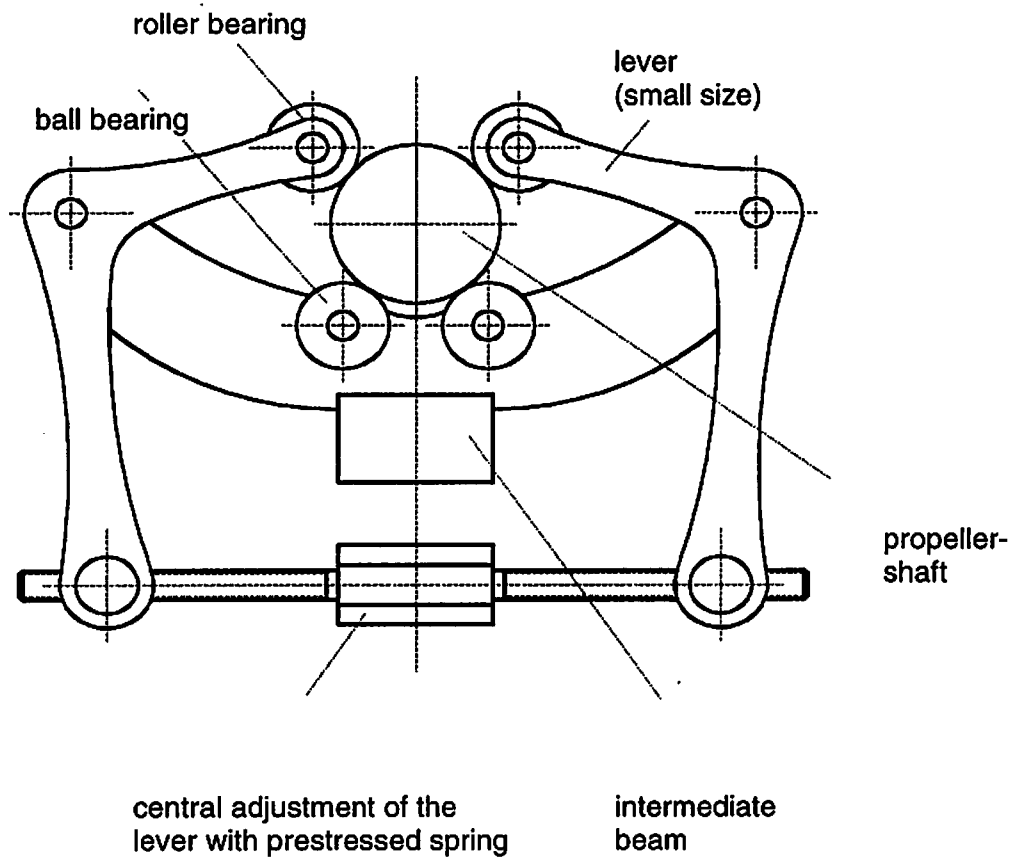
Portable sensor holder with double-6-fold bearing, front view
